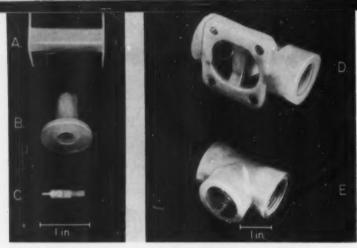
Typical parts injection molded of FEP. A: coil form; B: connector; C: electric terminal with insert (Excellex Industries); D: part of Grinnell-Saunders-type diaphragm valve (Tube Turns); E: pipe tee.
